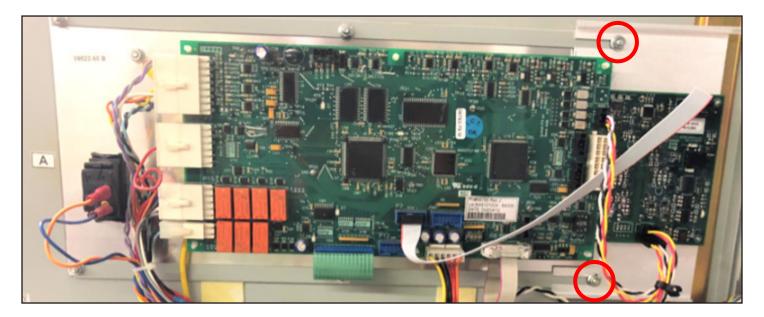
DVS100/DVS150 Channel A Control Board Assembly
